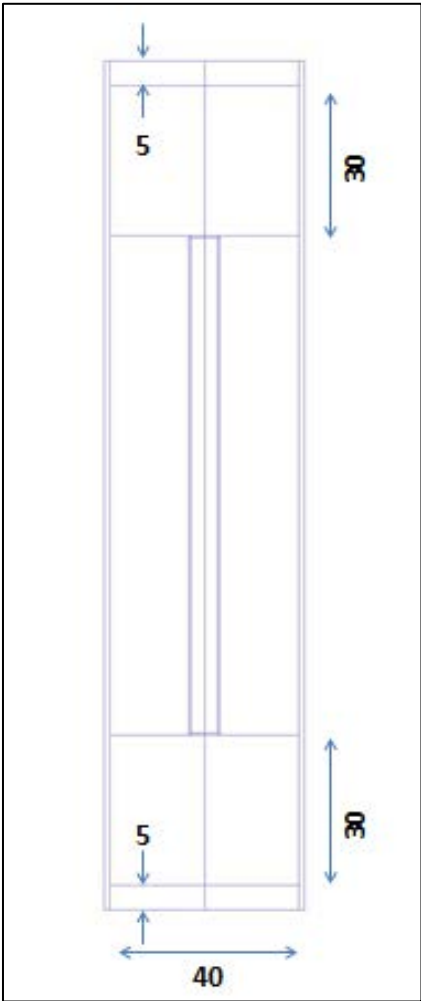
Dimensions of insulation blocks and top and bottom plates [mm]
